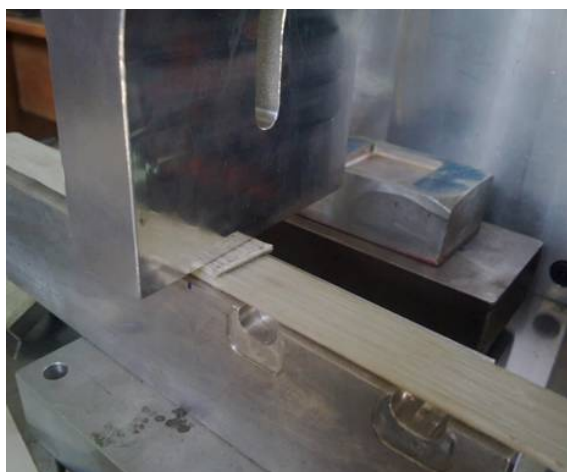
The placement of samples between the span of the ultrasonic welding machine
